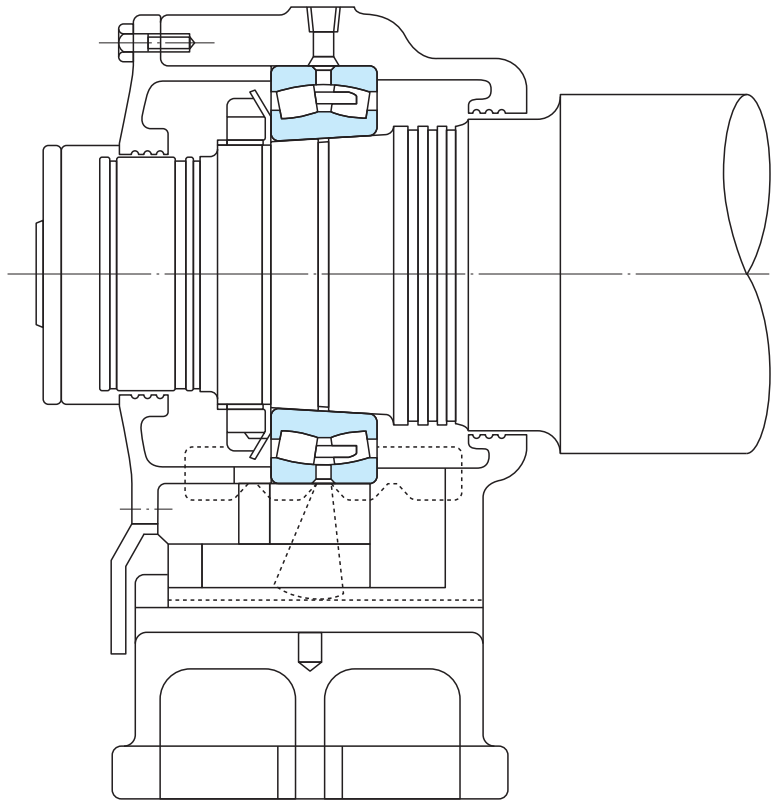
Dryer Roll, Paper Making Machine (Free End)
